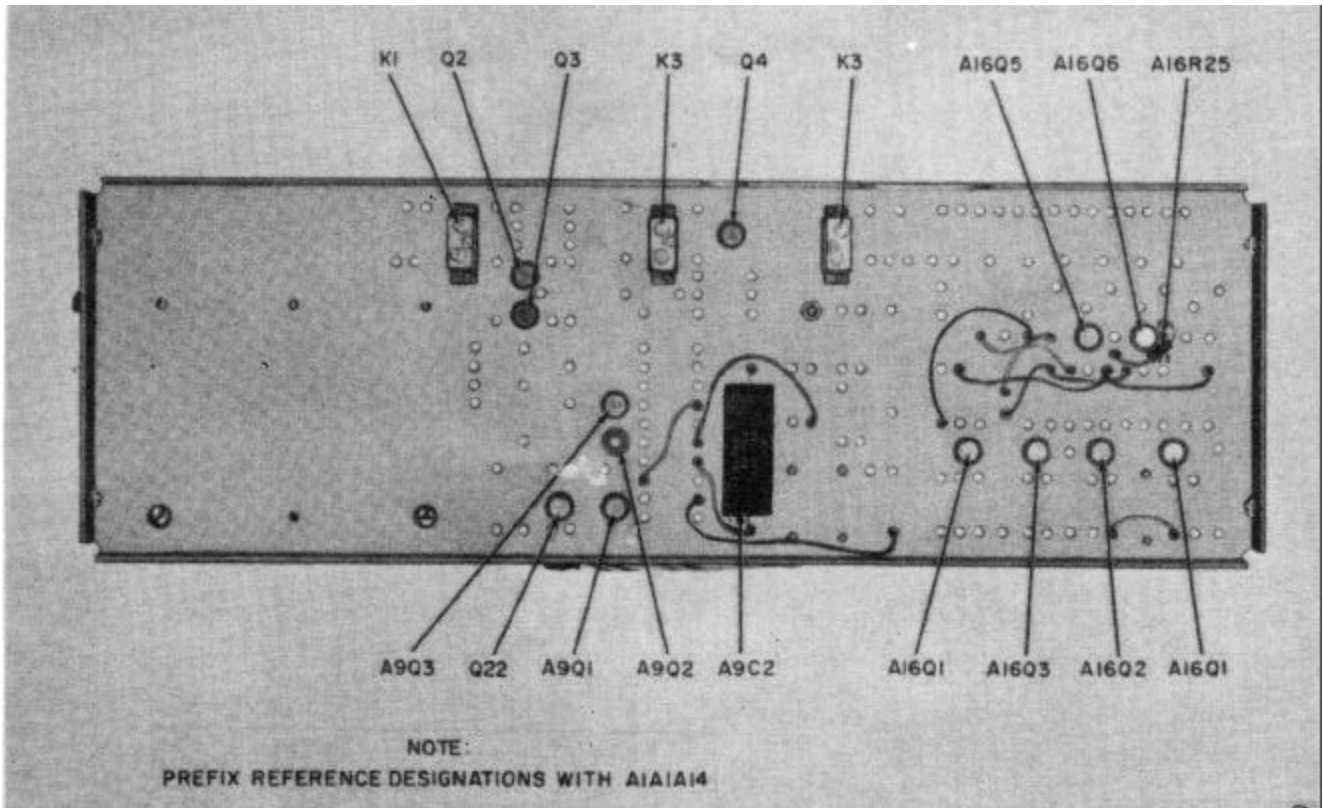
(2). Function chassis and component assembly A1A1A14, location of parts, (part 2 of 2).
